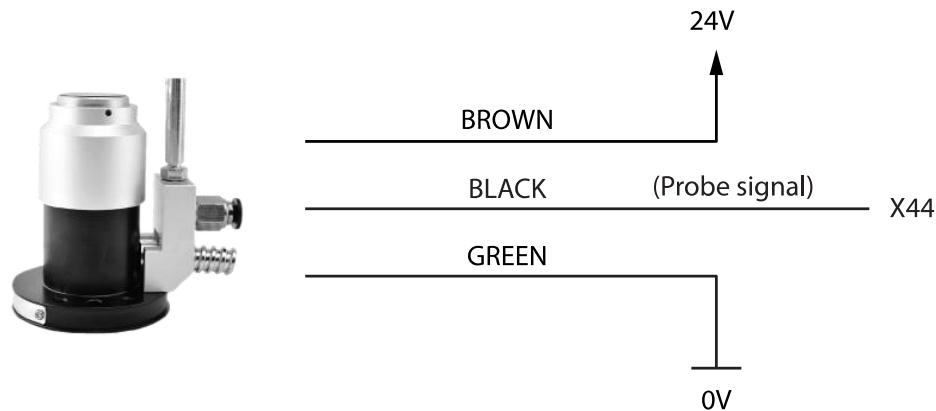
Tool length sensor wiring diagram (3 wires type)
